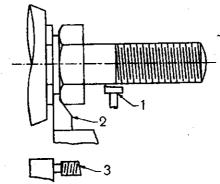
Setting of chamfering tool. 1. Position of stop on cross-slide, 2. Chamfering tool. 3. Turret saddle stop.
